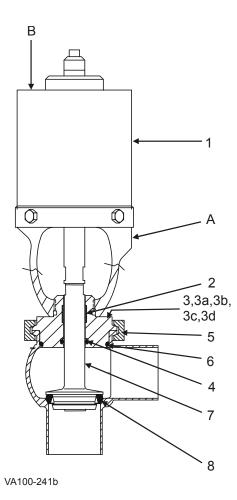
W61/W81 Shut Off Valve (Air-to-Raise Shown)
